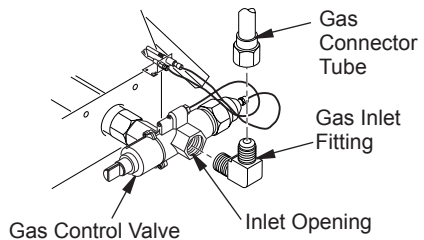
Installing Inlet Fitting and Gas Connector Tube
